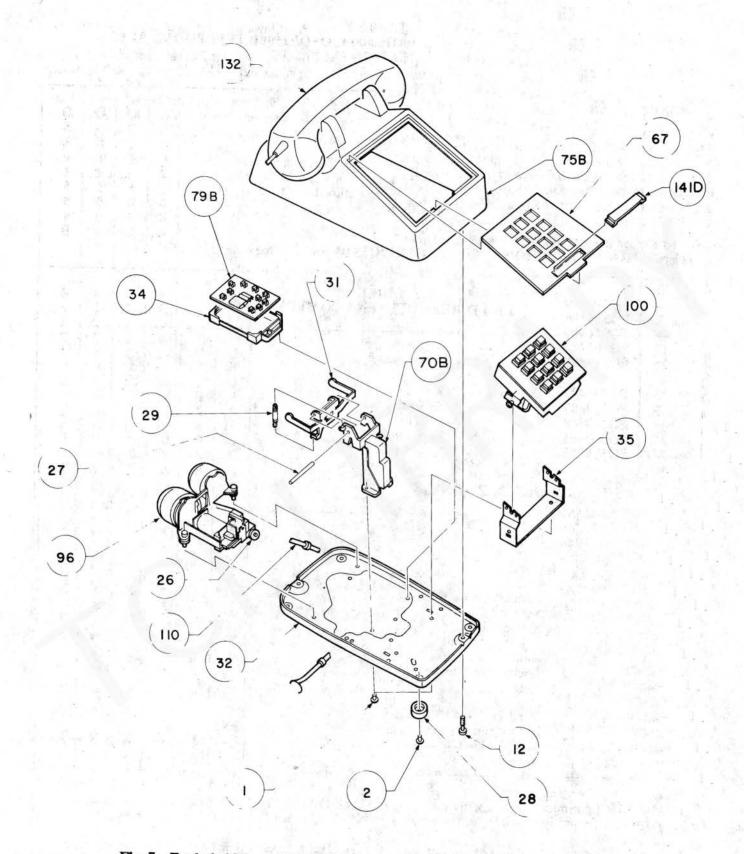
Exploded View of QSKE2500 and QSQE2500-Type Telephone Sets.
